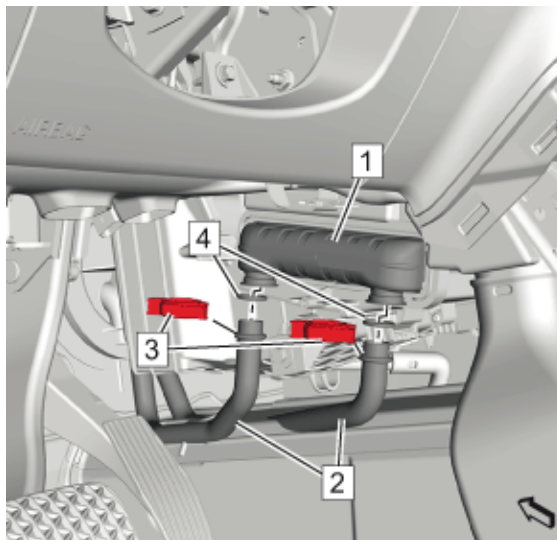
Heater Core, Clamps, Tubes And Sealing Rings
